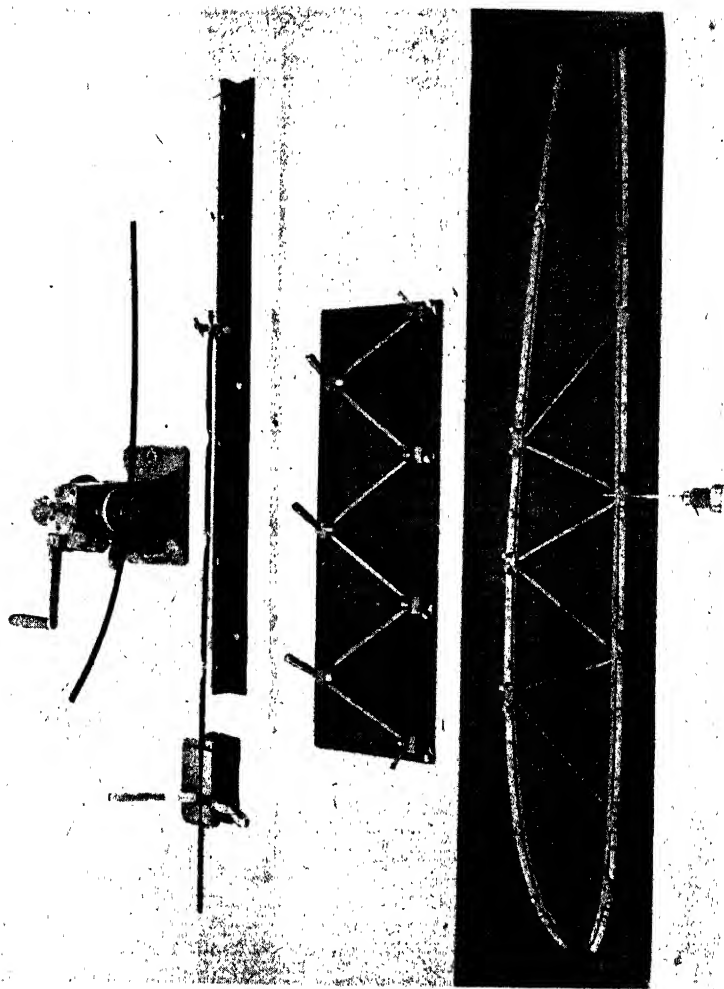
METHOD OF RIB ASSEMBLY (BRISTOL.)
